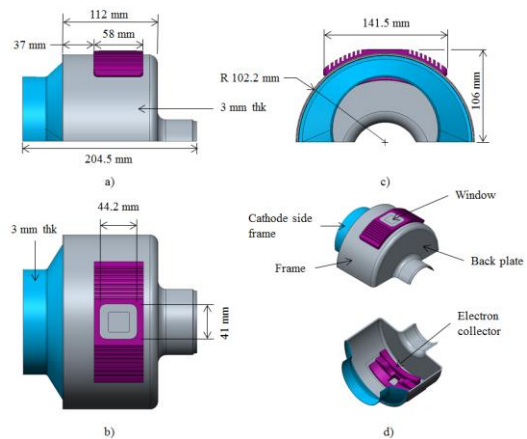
Geometric model of Concept design (a) Front view, (b) Top view, (c) Side view and (d) Isometric views
